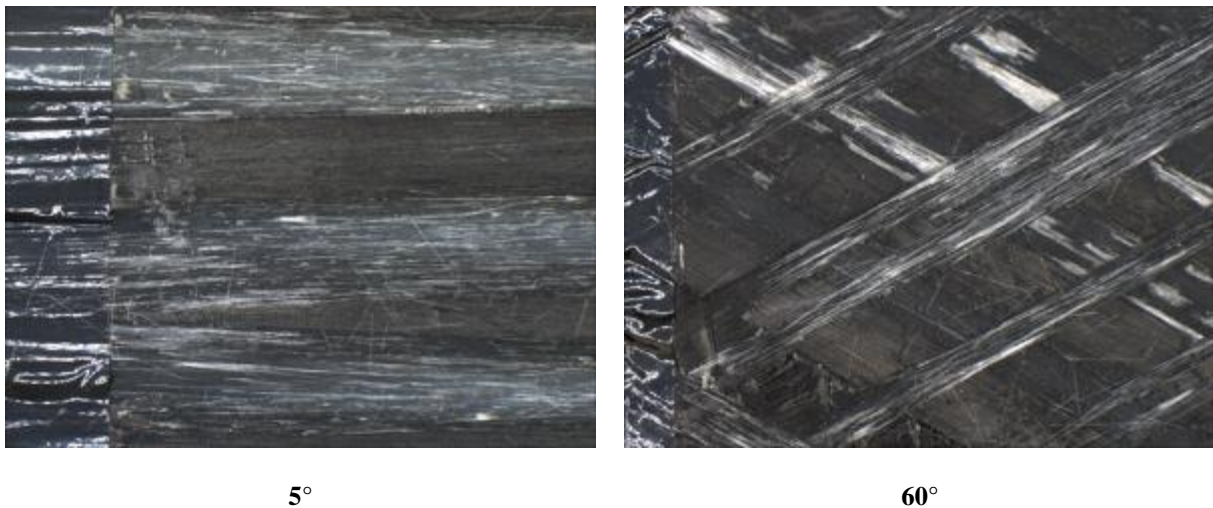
Mode II fracture surfaces (starter crack on the left).
